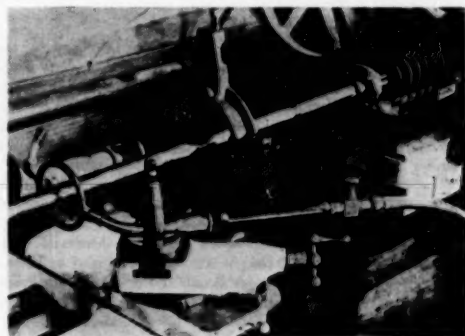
VIEW OF RING BURNER, SLIP RINGS, AND MERCURY CONTAINER
